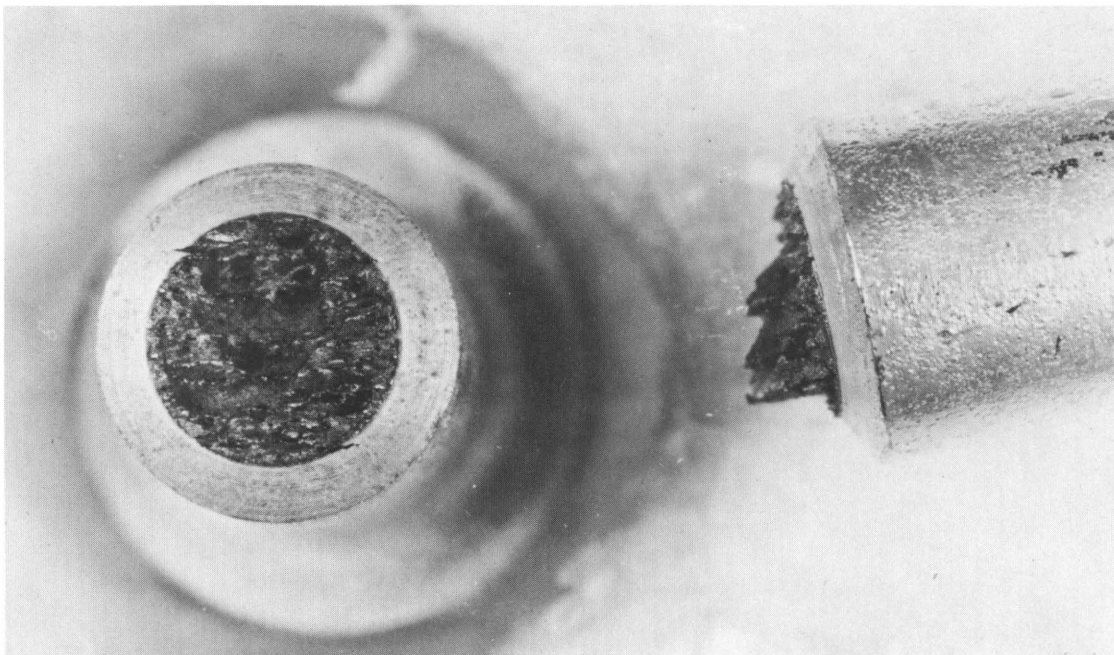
Fracture Surface of High Charge Specimen at High Magnification
